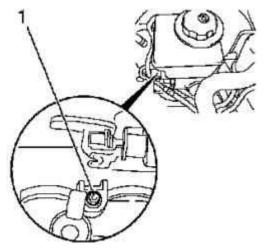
Bolt fixing tank hydraulic brake system: 1 - Bolt
